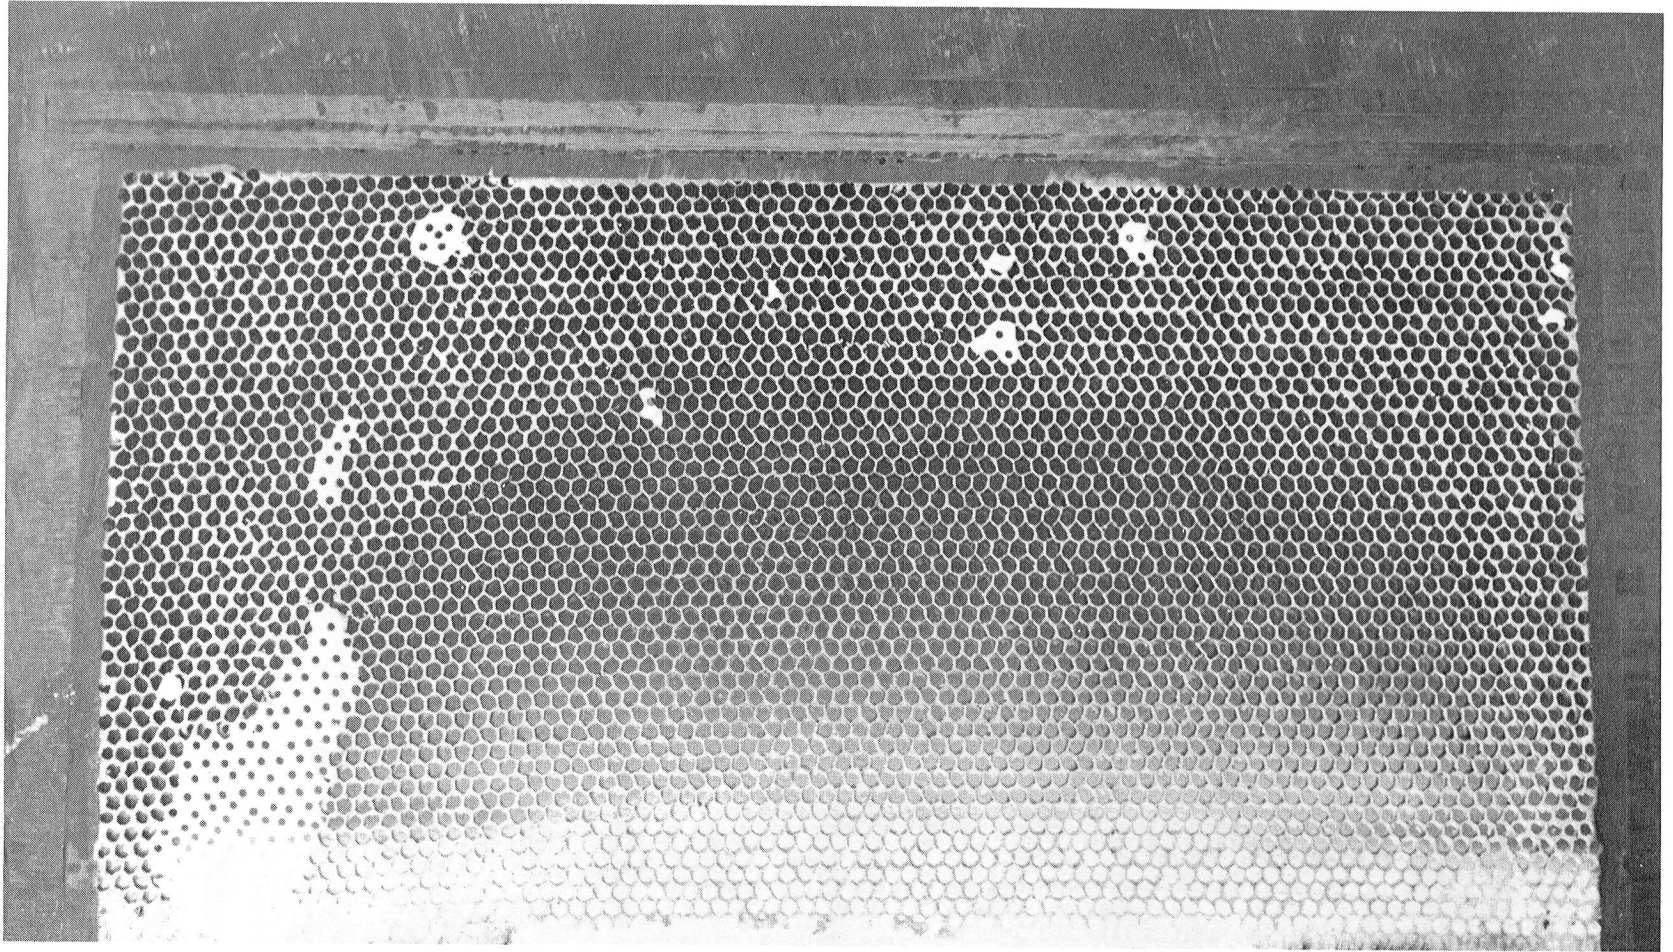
Lower Skin Plies Removed (S/N 0089)
